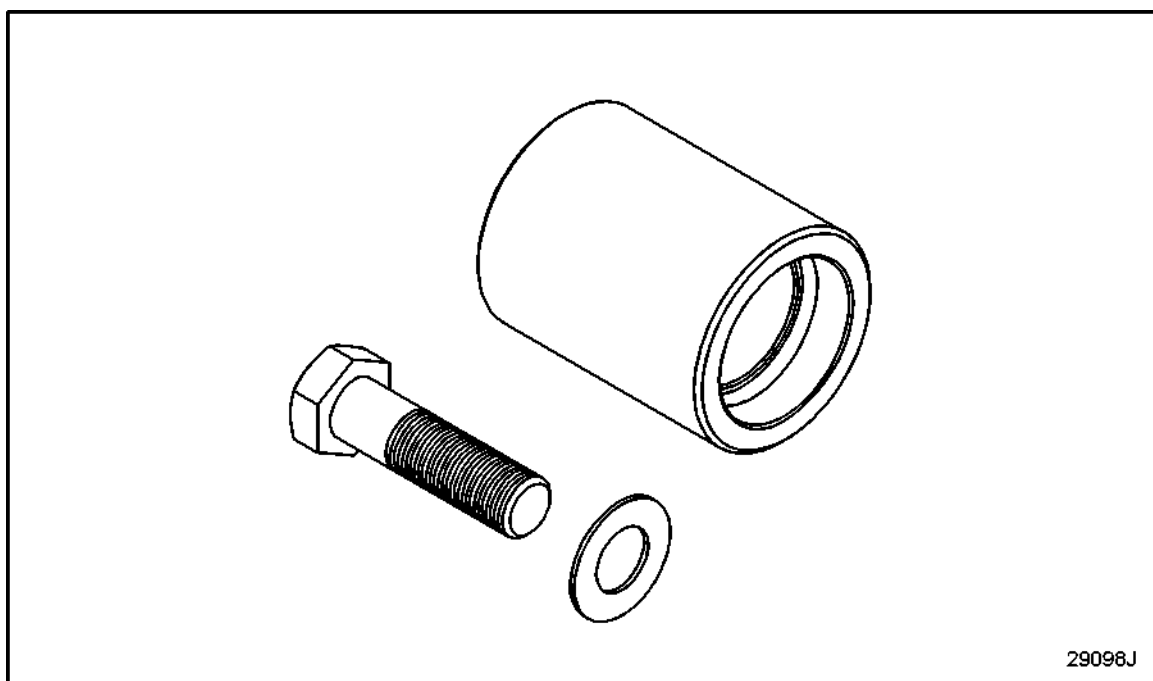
Front Seal Sleeve Installer (6V-53),J 22524
